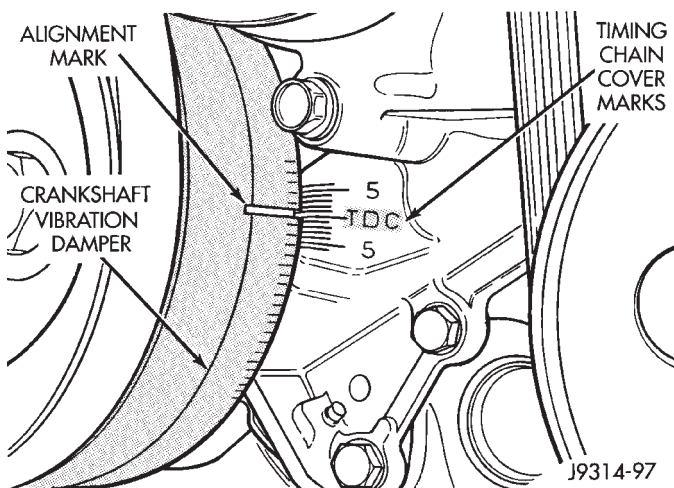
Damper-To-Cover Alignment Marks—Typical
